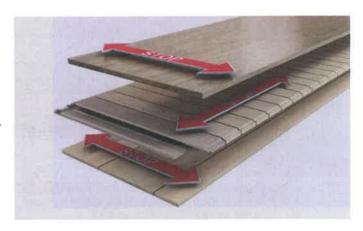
Cross structure of 3-layer wooden floorboard produced by Barlinek Inwestycje Sp. z o.o.
